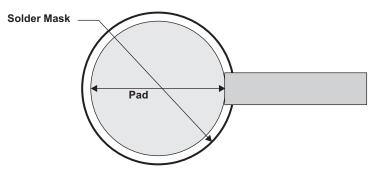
Non-Solder-Mask Defined (NSMD) PCB Land
